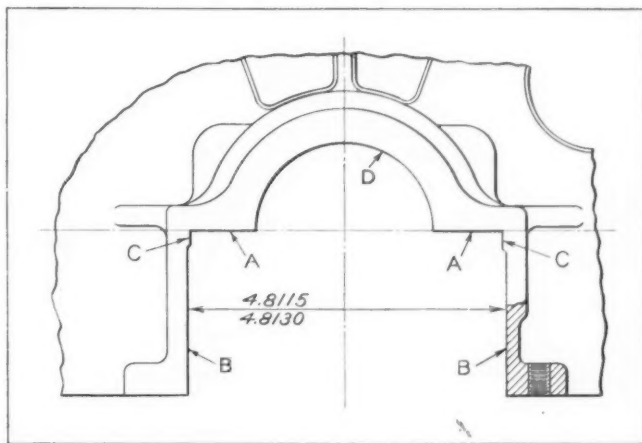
Diagram Indicating the Various Surfaces on an Automobile Cylinder Block that are Machined with the Broach Shown in Fig. 1
